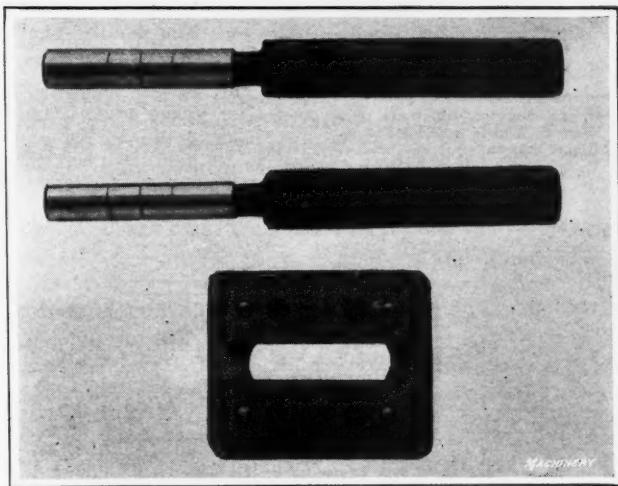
Taper Plug Gage with Reference Gage, for Cylindrical Holes
